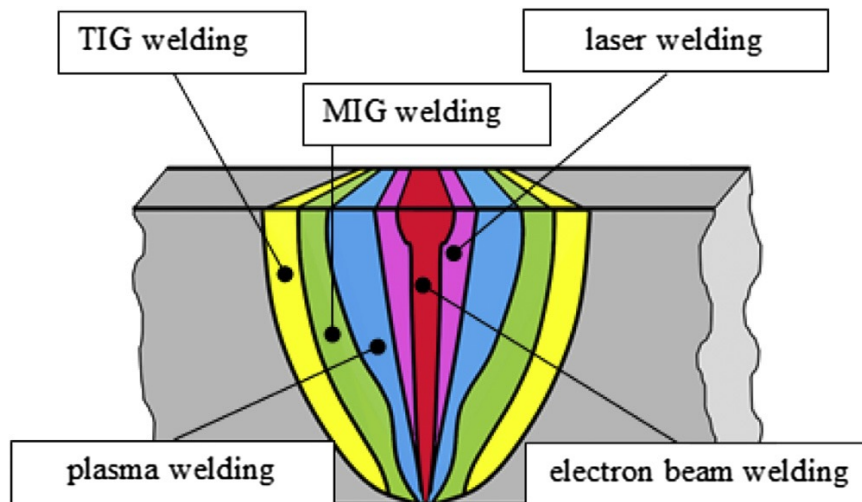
Comparison of a butt weld made using various welding technologies (56)
